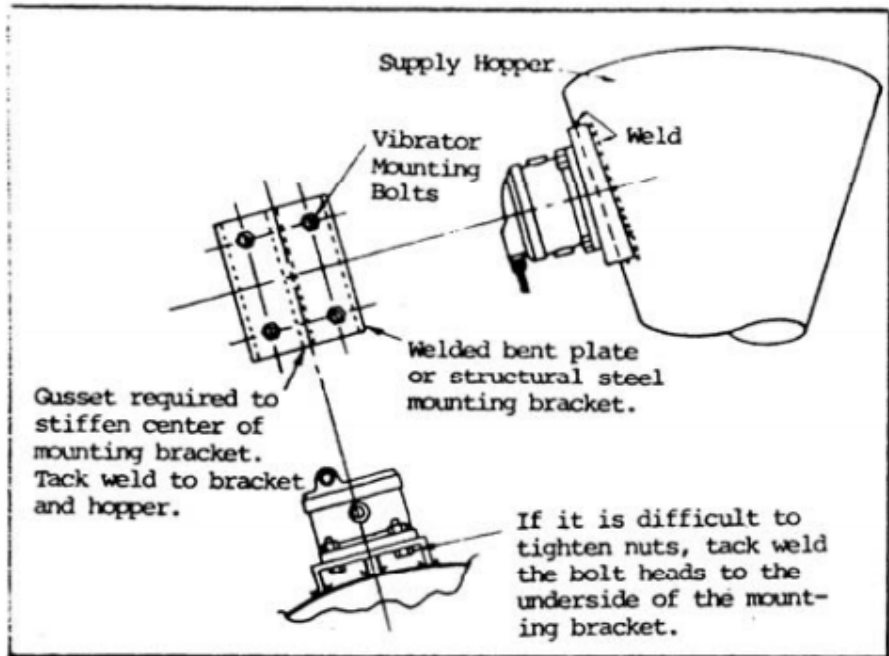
VIBRATOR MOUNTING POSITIONS
